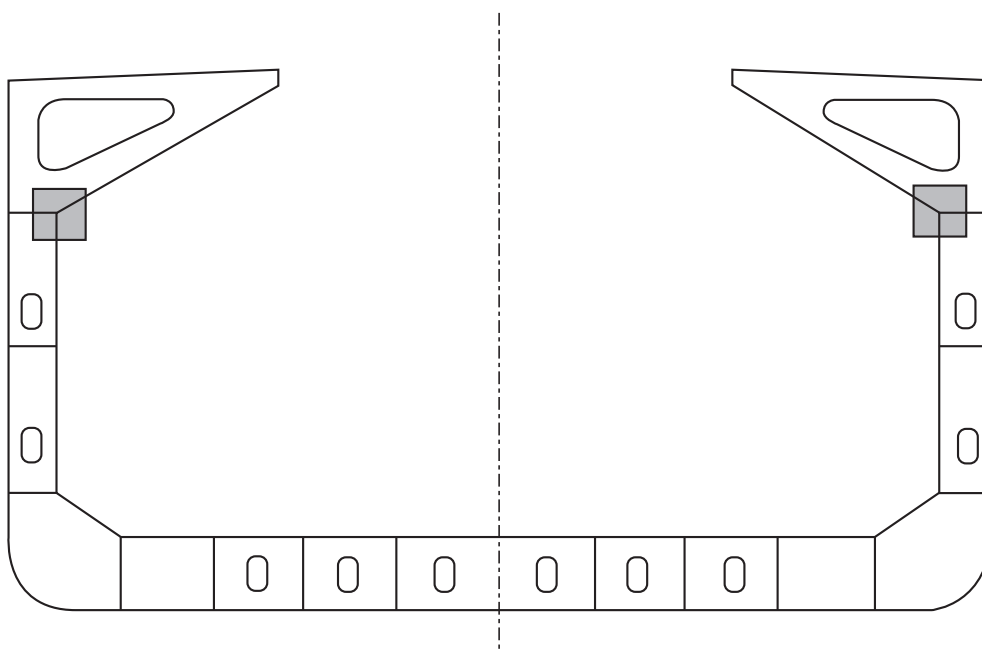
Screening areas at connection of corrugation and upper supporting structure to upper stool
